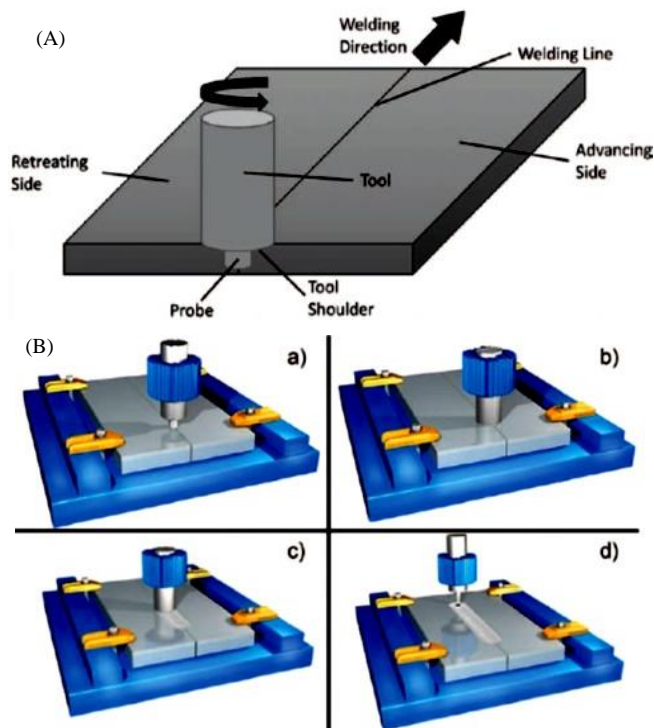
(A) Scheme of FSW process; (B) scheme of FSW process steps: (a) rotating tool before plunging, (b) plunging and then tool shoulder touches the work piece surface producing frictional heat, (c) rotating tool traverses along the work piece, and (d) pulling out from the workpiece.
